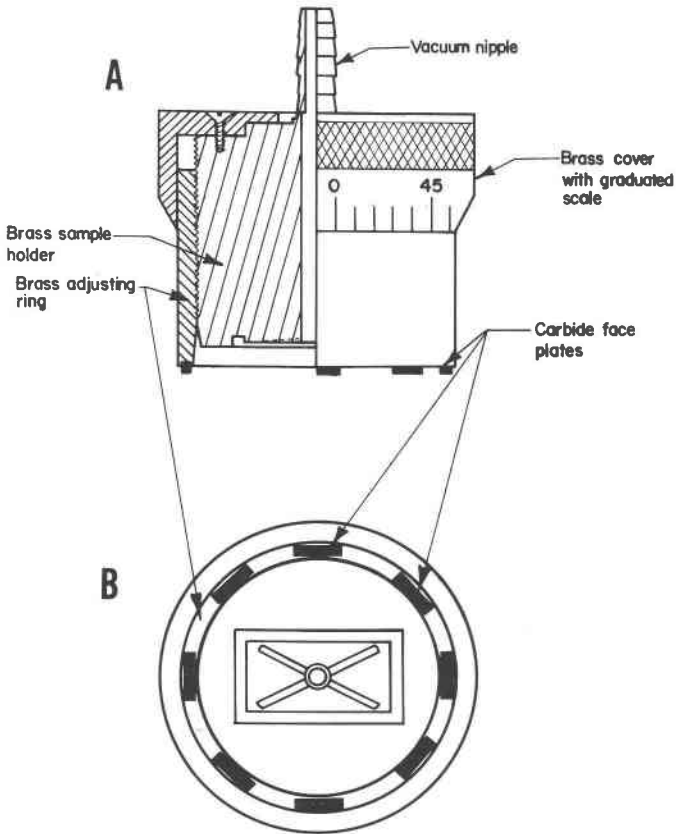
(A) Side view of the micrometer grinder with a half-view cut-away. (B) Bottom view of the grinder showing the positioning of the carbide face plates and the suction chuck.
